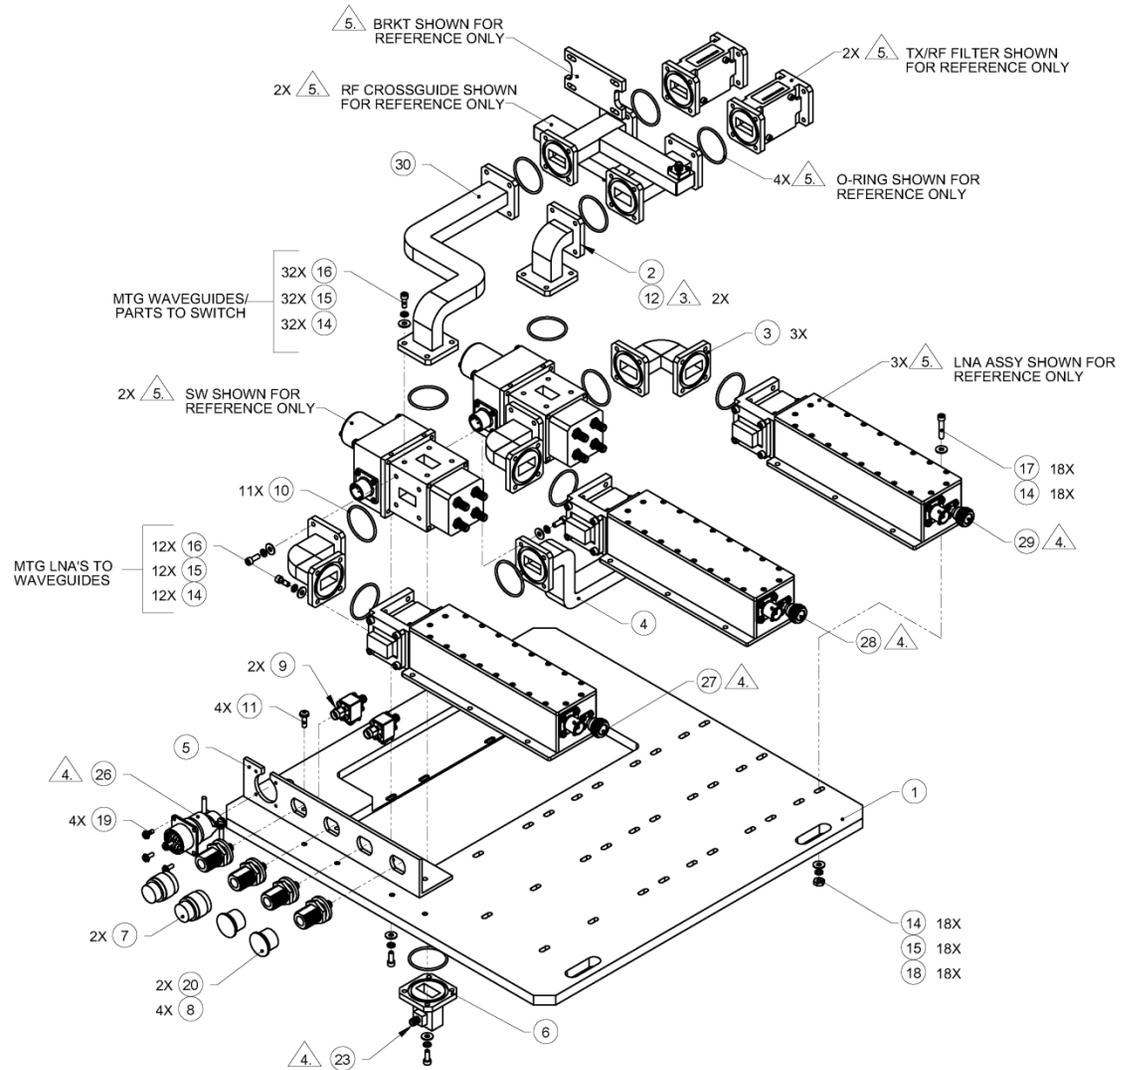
Ku-Band LNA 1:2 Redundant System (Exploded View)
